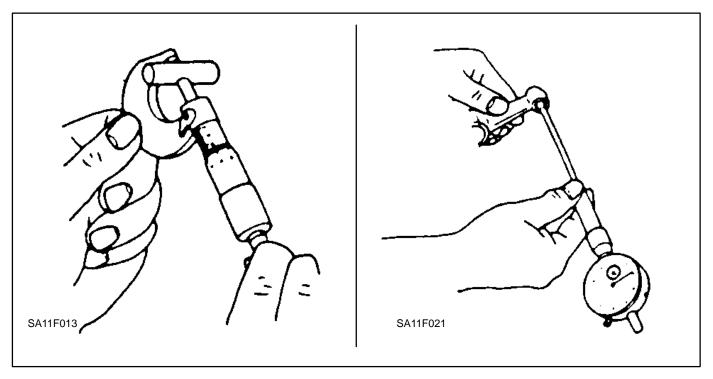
PISTON PIN AND CONNECTING ROD CLEARANCE
